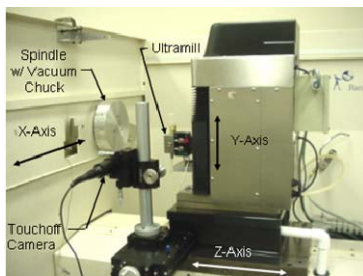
3-axis diamond turning machine (DTM). Spindle is currently locked when using the Ultramill.
